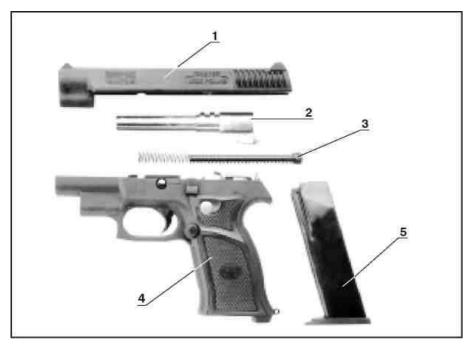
The pistol partially disassembled: 1 – slide; 2 – barrel; 3 – recoil mechanism; 4 – receiver (frame); 5 – magazine
